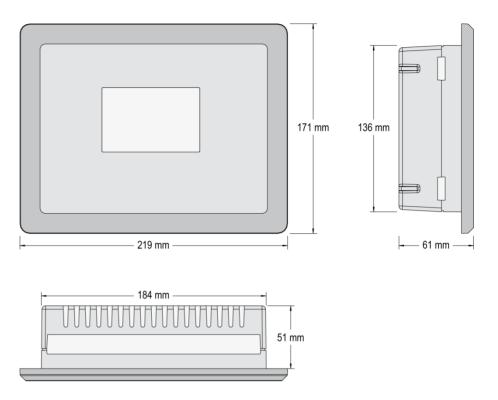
Plastic housing LS-521 V2 - dimensions
